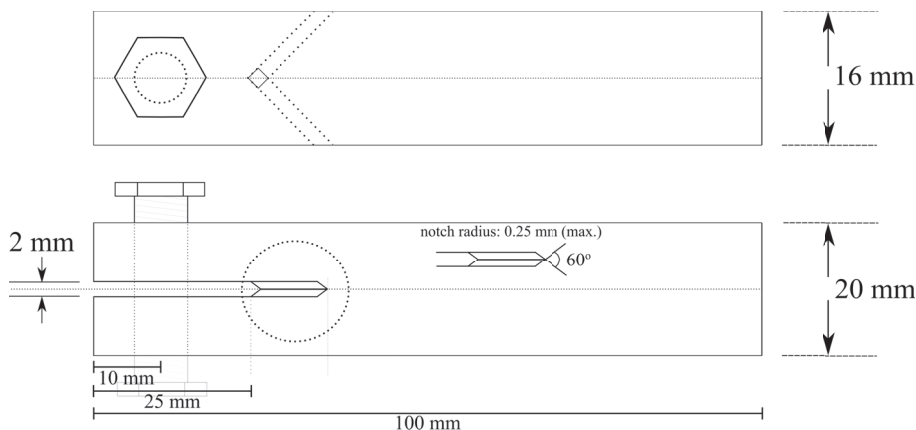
Schematic drawing of the DCB specimens used in this work.
